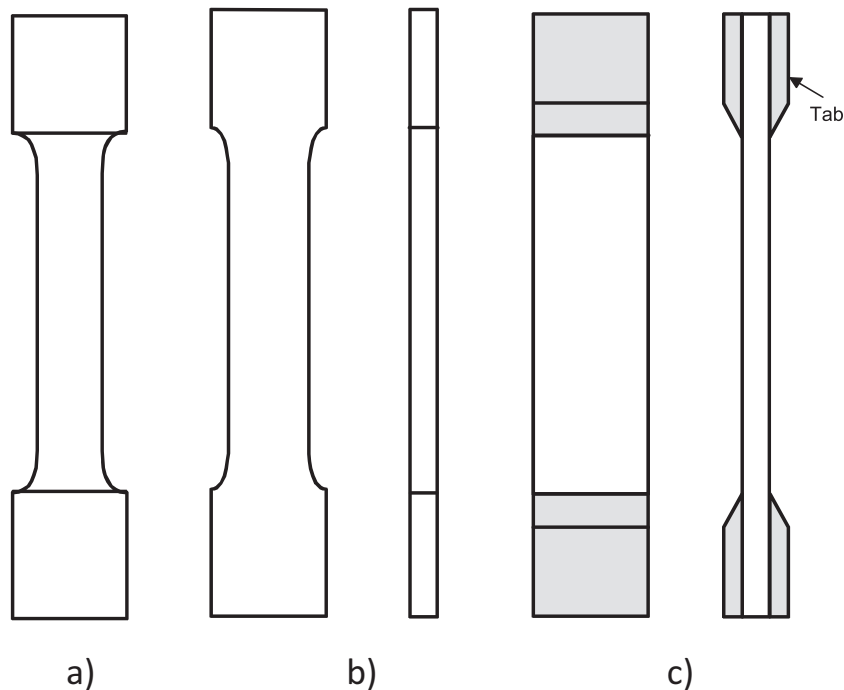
Layout of the tensile test sample: (a) Cylindrical specimen, (b) Untabbed, dog-boned flat specimen, (c) Tabbed, straight-sided flat specimen.
